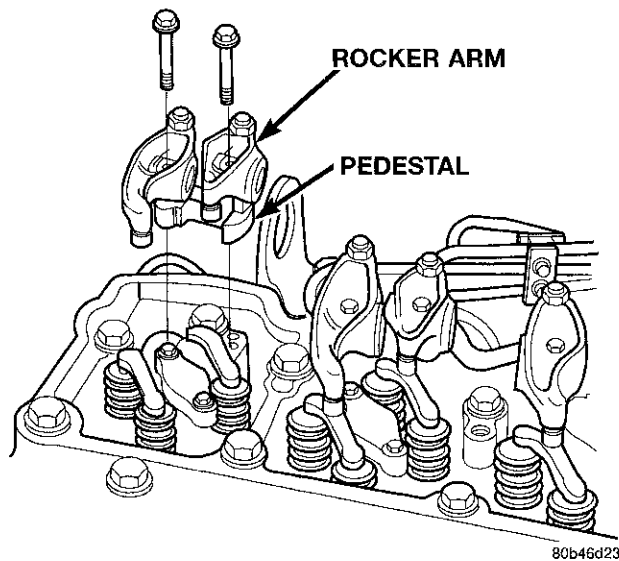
Rocker Arm and Crosshead Removal/Installation
